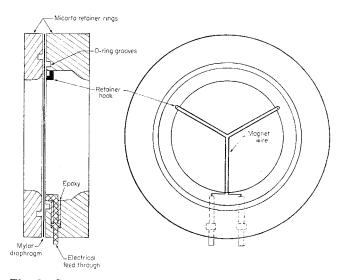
Cross section of retainer ring assembly and wire configuration.
